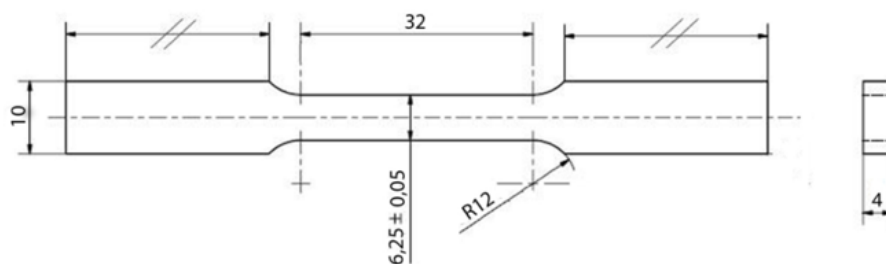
Geometry and dimensions [mm] of flat tensile specimens.
